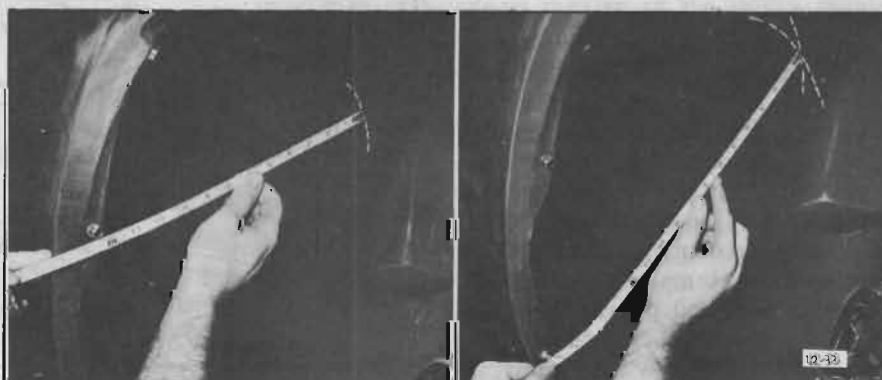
Locating Dimple on Right Inner Fender Skirt
